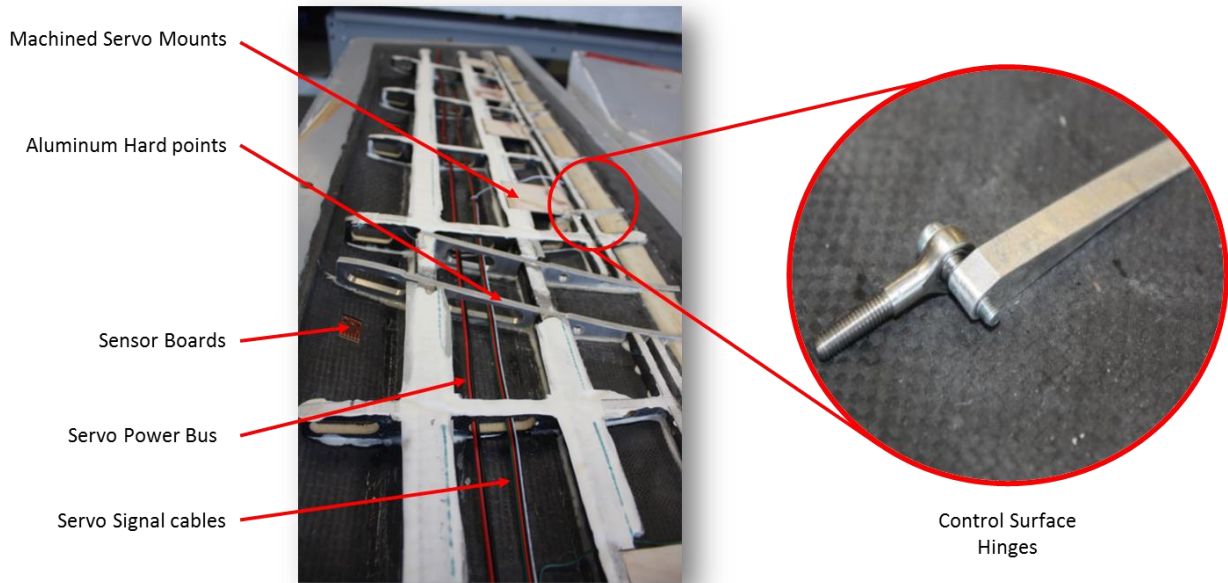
SOME OF THE CUSTOM COMPONENTS FABRICATED (FORWARD WING SHOWN)
